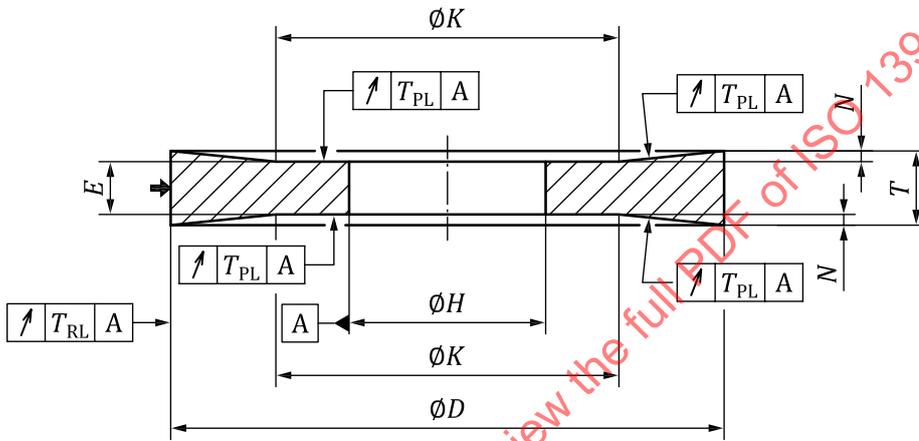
Grinding wheel, relieved on both sides (Type 21)
